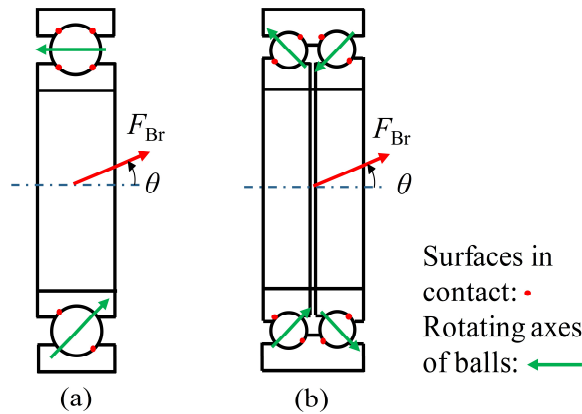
(a) Four-point contact bearing; (b) double row angular contact bearing
